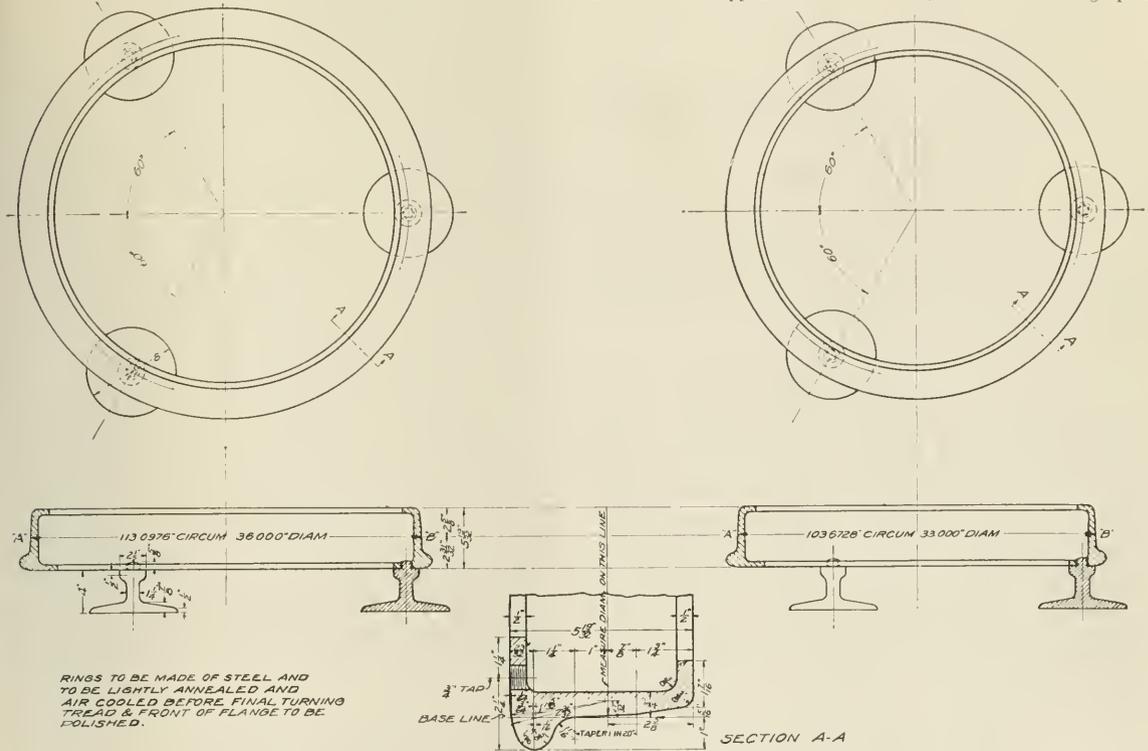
Exhibit A.—Wheel Circumference Measure Test Rings for 33-in. and 36-in. Wheels
